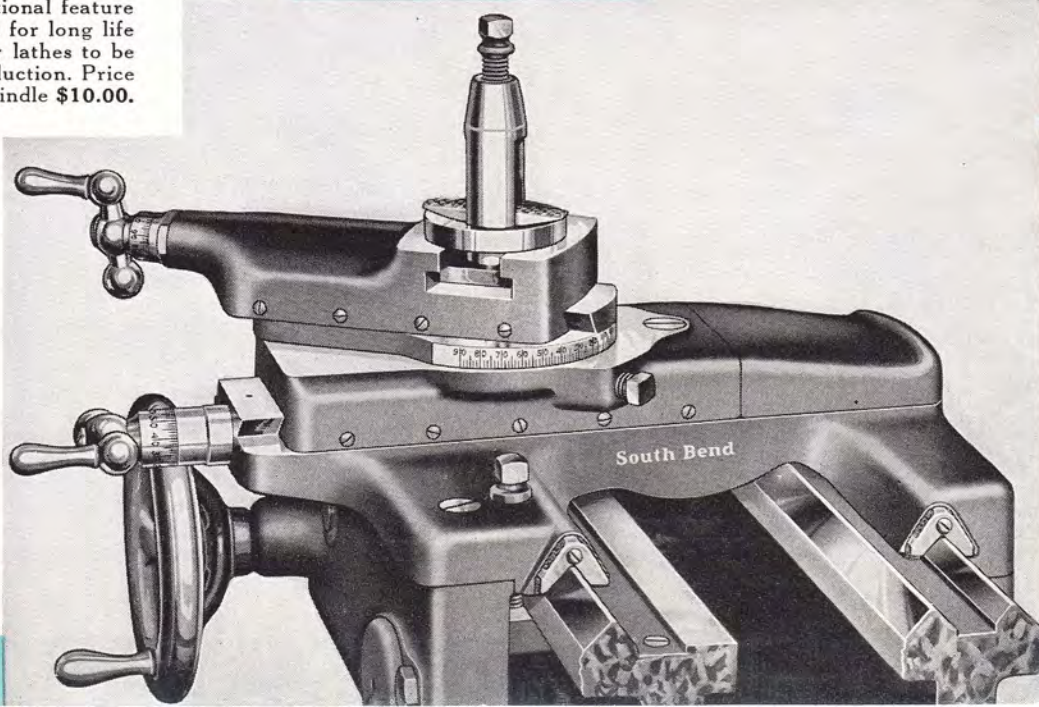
Below. Carriage for 9-inch "Workshop" Lathe.
